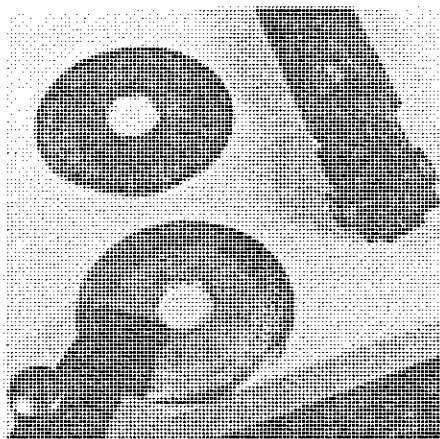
A matting roller can be used to roughen the drive surfaces of the pulley flanges; but this proved unnecessary
